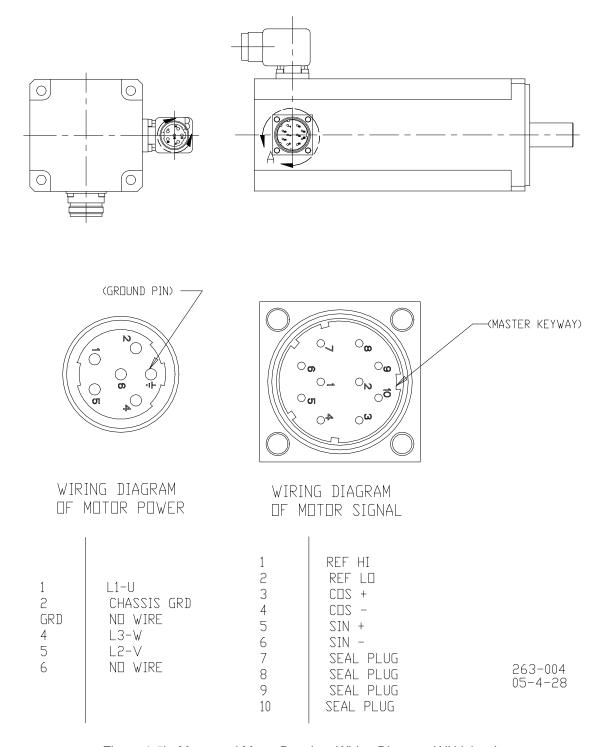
Motor and Motor Resolver Wiring Diagram (All Valves)
